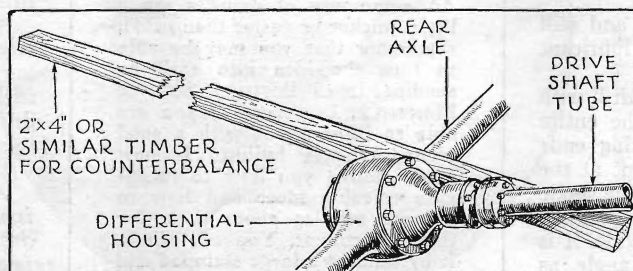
A long plank is placed over the rear axle and beneath the drive shaft tube, to raise tube so the drive shaft can be guided home
